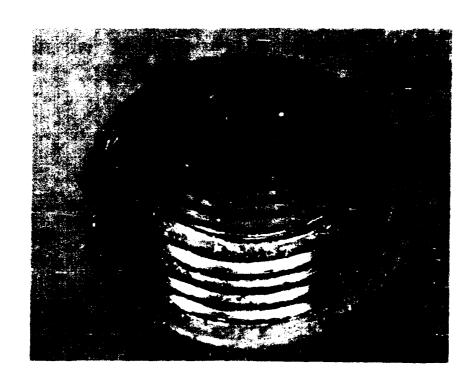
THE FILLER BLOCK, OF THE MANIFOLD CHECK VALVE ASSEMBLY, TAKEN FROM AIRCRAFT A9-756 SHOWING A MACHINED SCREW THREAD. THE BRIGHT SURFACE TOWARDS THE TOP OF THE FIGURE IS WHERE A STAINLESS STEEL FITTING HAS BEEN REMOVED TO FACILITATE INSPECTION. NOTICE THE BURR OF ANODISED METAL (ARROW) LEFT ON THE ANODISED SCREW THREAD. METAL BURRS SUCH AS THIS, DUE TO MORE FAVOURABLE SURFACE TO VOLUME RATIO CAN BE IGNITED MORE READILY THAN THE METAL BLOCK. THE LOCATION OF THE METAL BURRS WITHIN A SCREW THREAD (RATHER THAN ON A FLAT SURFACE) WOULD FURTHER ENHANCE THE PROBABILITY OF IGNITING THE MAIN BLOCK OF ALUMINIUM
